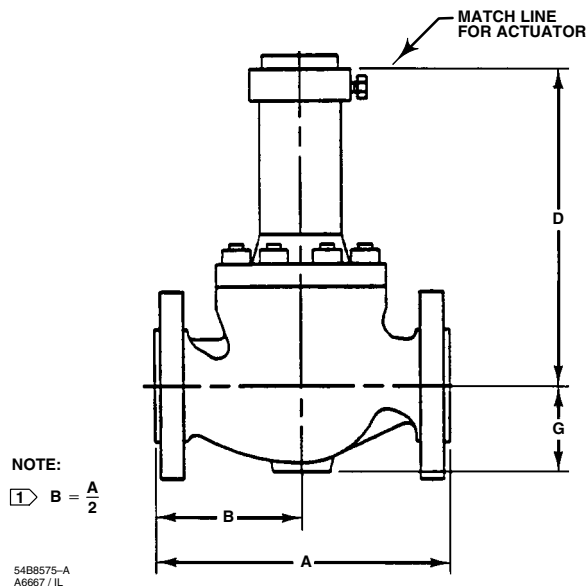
Design ET-C and EWT-C Valve Dimensions (also see table 9)
